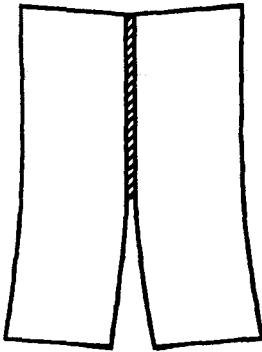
Rotational deformation of aluminum extrusion plates during automatic welding
